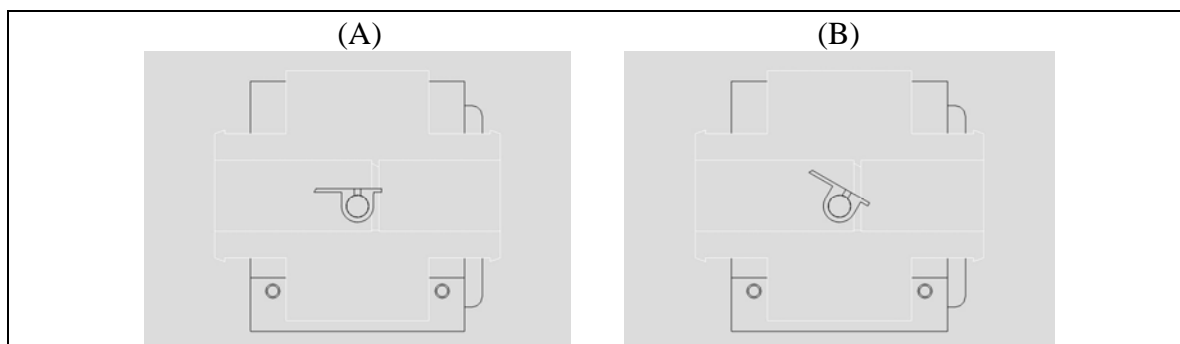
Valve cross sectional views at (A) 100% and (B) 65% open positions
